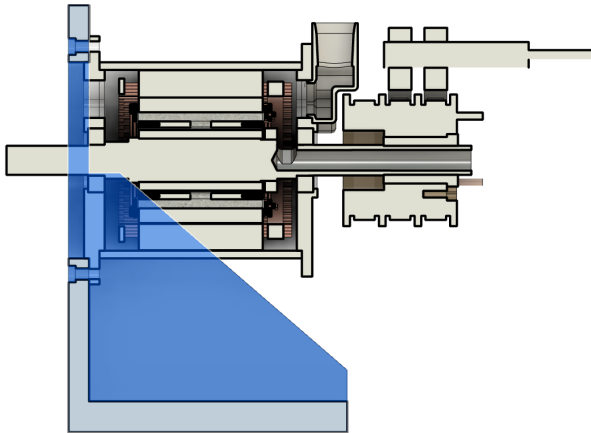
Radial cross section of the 3D CAD model of the prototype, highlighting the mount in blue.
